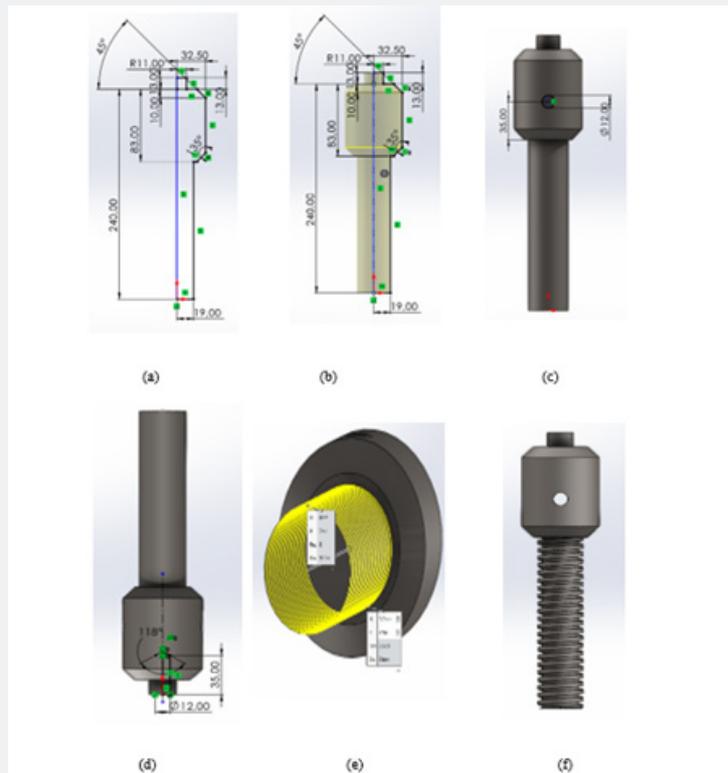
Power Screw (Part-3) Design (a) Dimensional 2D view, (b) Revolve (c) Extruded Cut, (d) Hole Specification, (e) Helis Spiral, (f) 3D CAD model.
